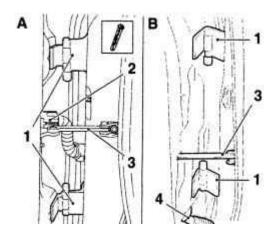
Mounting Side Door: A - Front side door B - rear side door, 1 - hinges, 2, 4 - electrical connectors, 3 - door arrester
